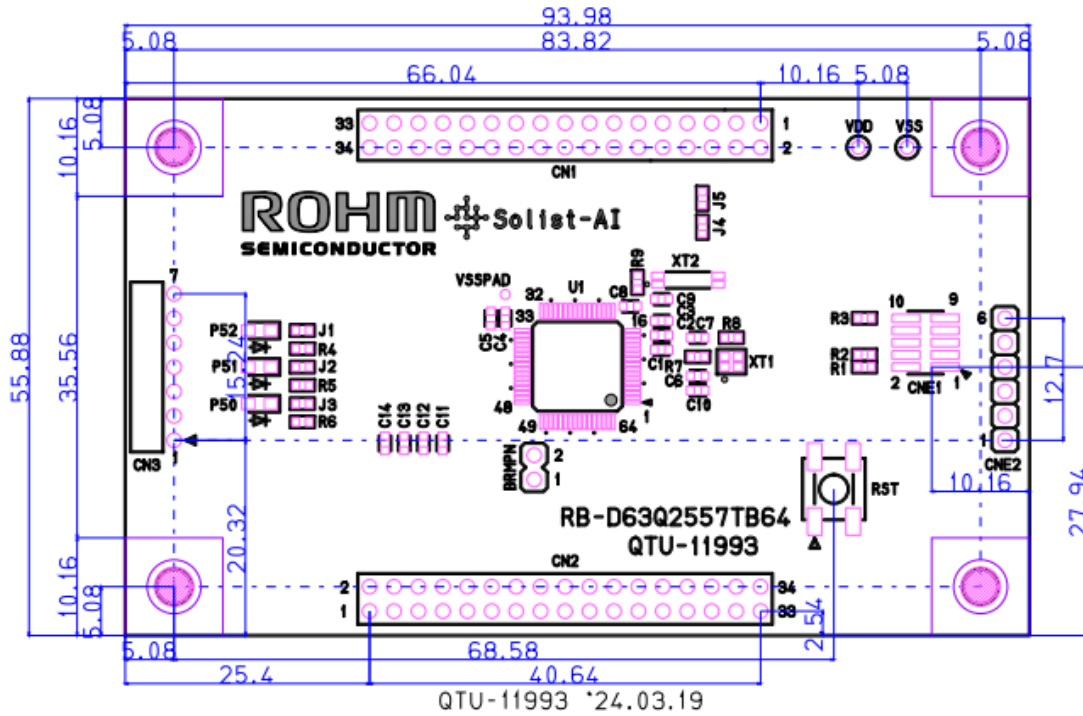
RB-D63Q2557TB64 Board Dimensions (Top View)
